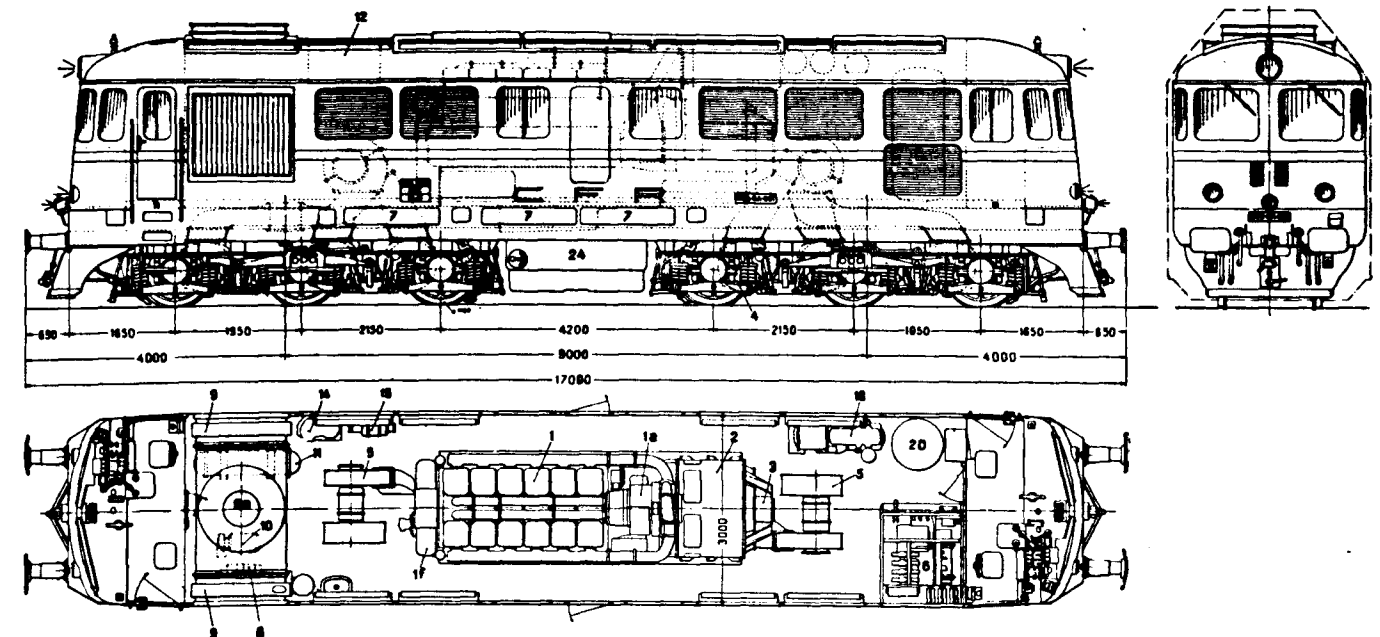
Drawings of 2,100 h.p. diesel-electric locomotives for Rumania showing the good layout arrangement of the equipment.
